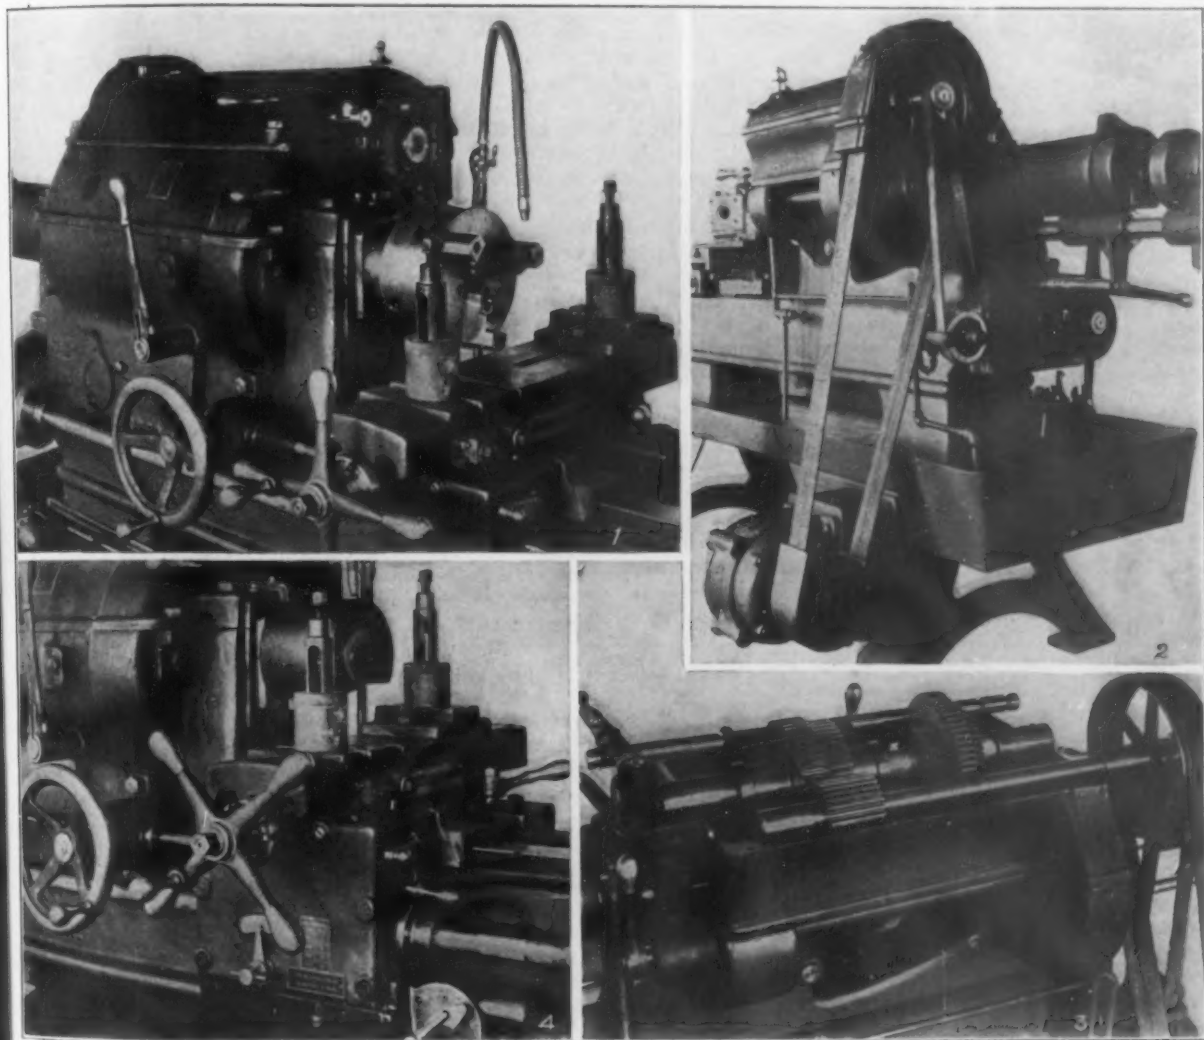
All-Geared Head for Foster No. 5 Screw Machine. Fig. 2.—Rear View of the Geared Head Arranged for Motor Drive. Fig. 3.—Arrangement of Gears in Head. Fig. 4.—Cross Slide Equipped with Hand Longitudinal and Power Cross Feed
